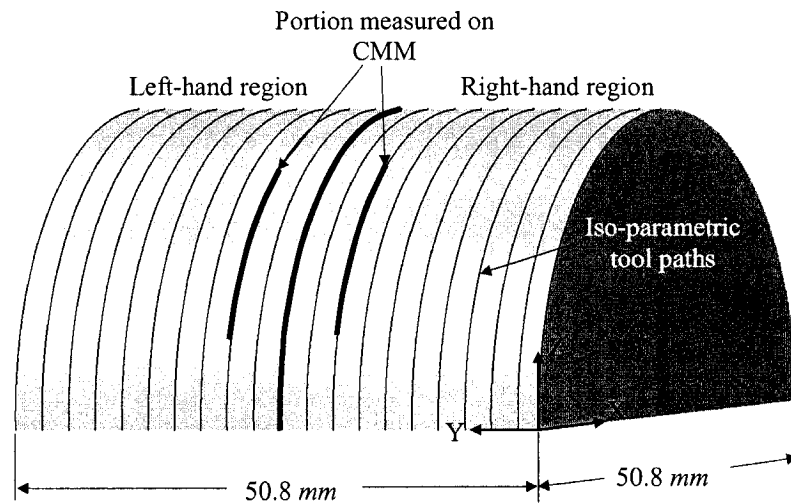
Semi-cylindrical surface part with iso-parametric tool paths.
